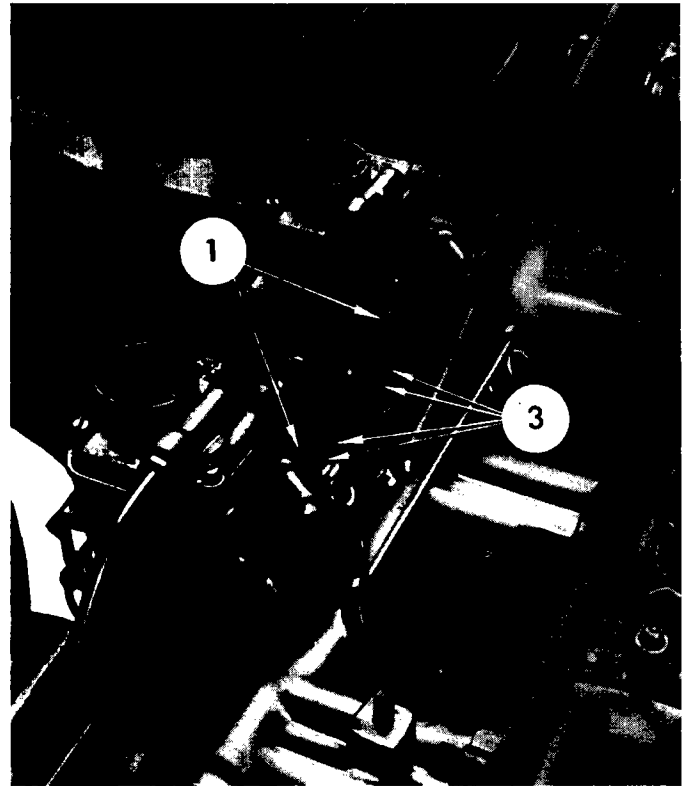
L.H. view of carburettors, showing flexible linkage clamping bolts (3) and throttle stop screws (1)
